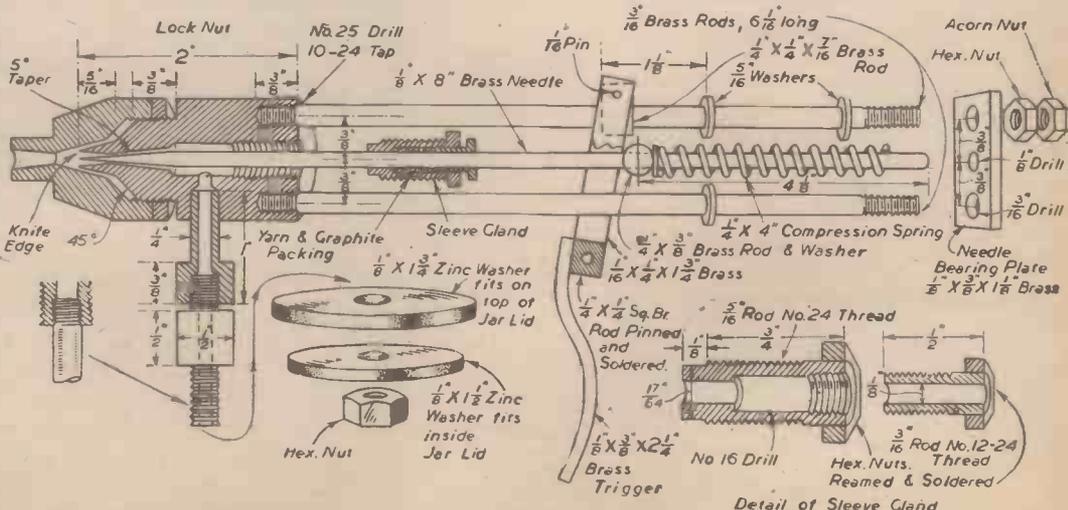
Details of the complete assembly for the syphon gun. Fig. 24.—Sectional details of sleeve gland.
